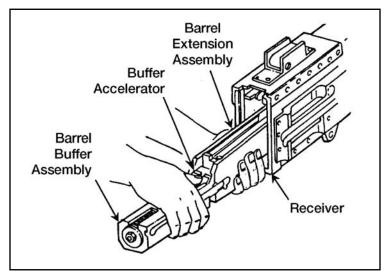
Installation of the barrel buffer and barrel extension assemblies
